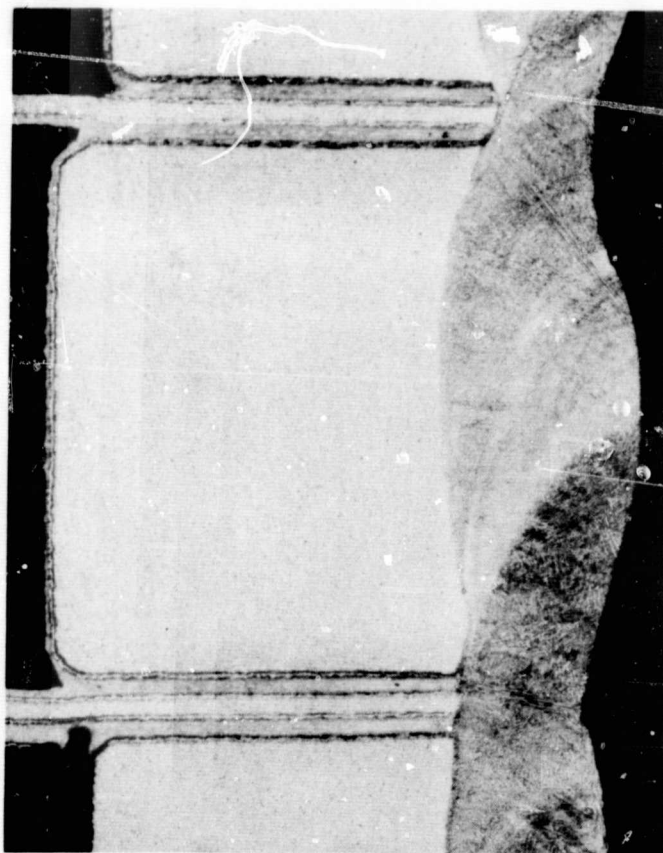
Photomicrographs of Seal Plate-to-Machined
